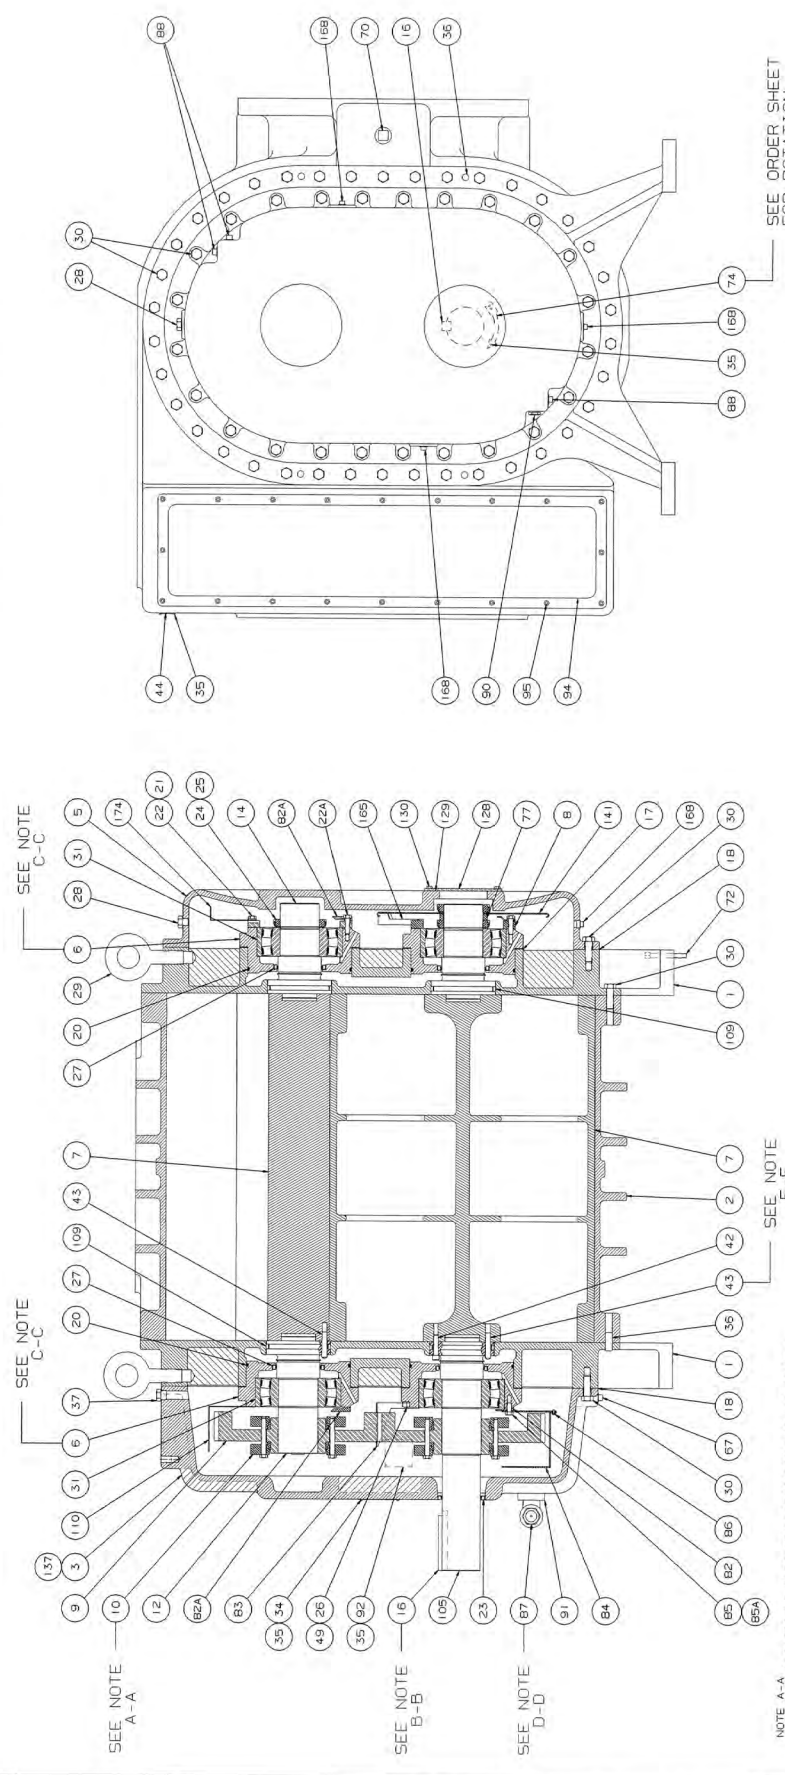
Assembly of 10" thru 12" DVJ-V V-Belt Drive Splash Lobe
